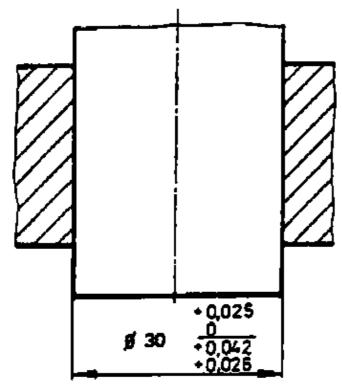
Entry of dimensions of fits in assembly drawings by nominal deviations
